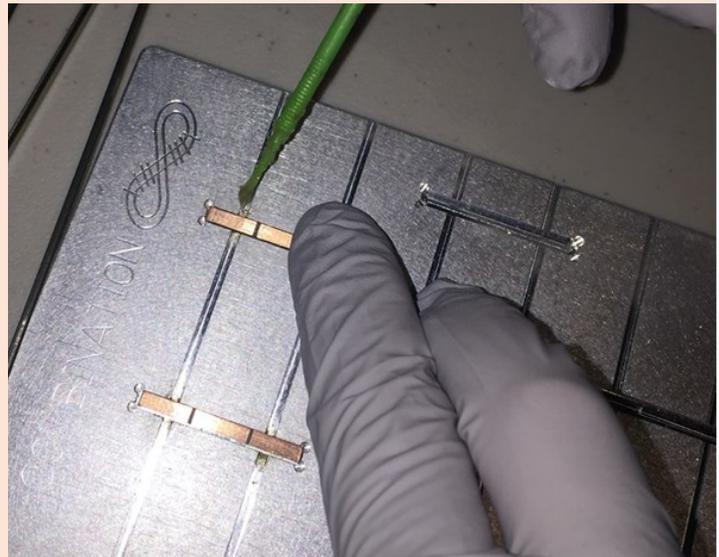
PCB ties placed in the pre-cleaned fixture and application of flux using micro-brush
